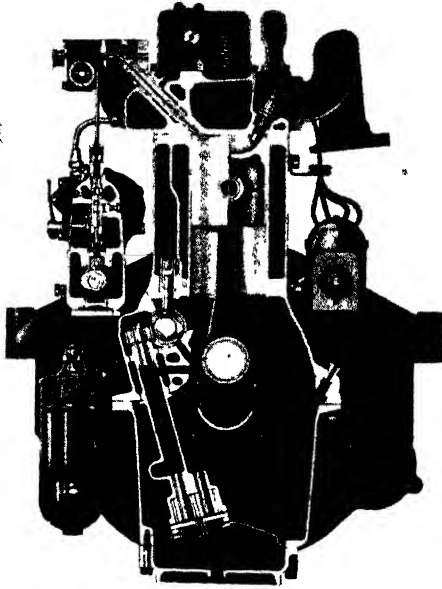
Waukesha Hesselman automotive-type oil engine.
